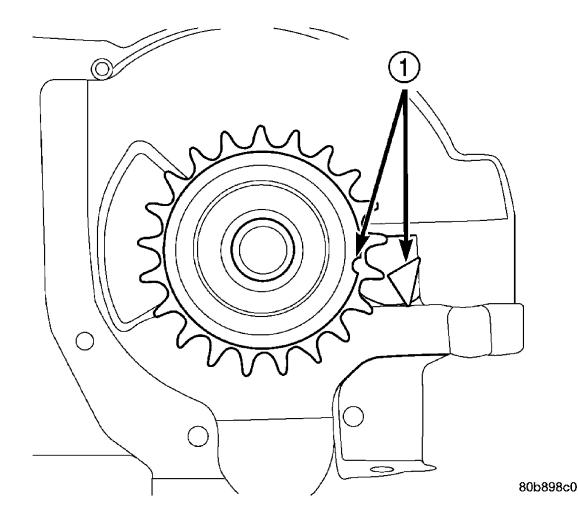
View Of Crankshaft Positioned At 60 Degrees ATDC No. 1 Cylinder Courtesy of CHRYSLER LLC
